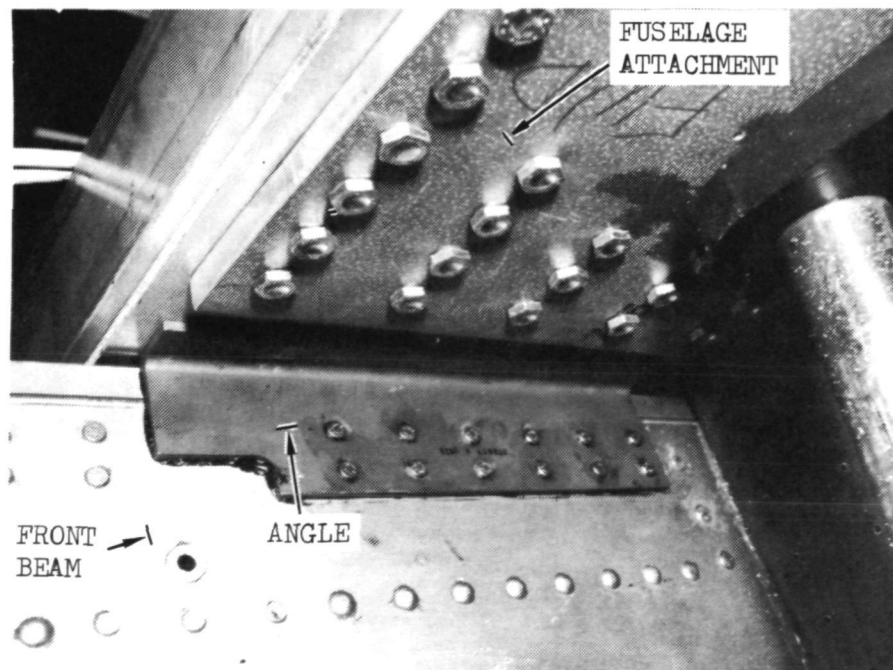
TYPICAL INSTALLATION OF REINFORCEMENT ANGLE
